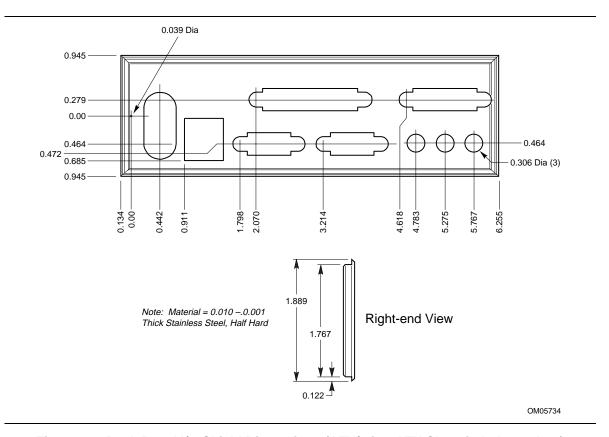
Back Panel I/O Shield Dimensions (ATX/microATX Chassis-Independent)
